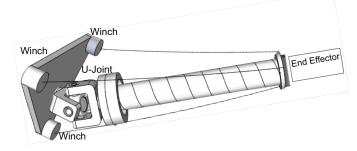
A rendering of a Spiral Zipper mounted on a universal joint base with winch and cables.
